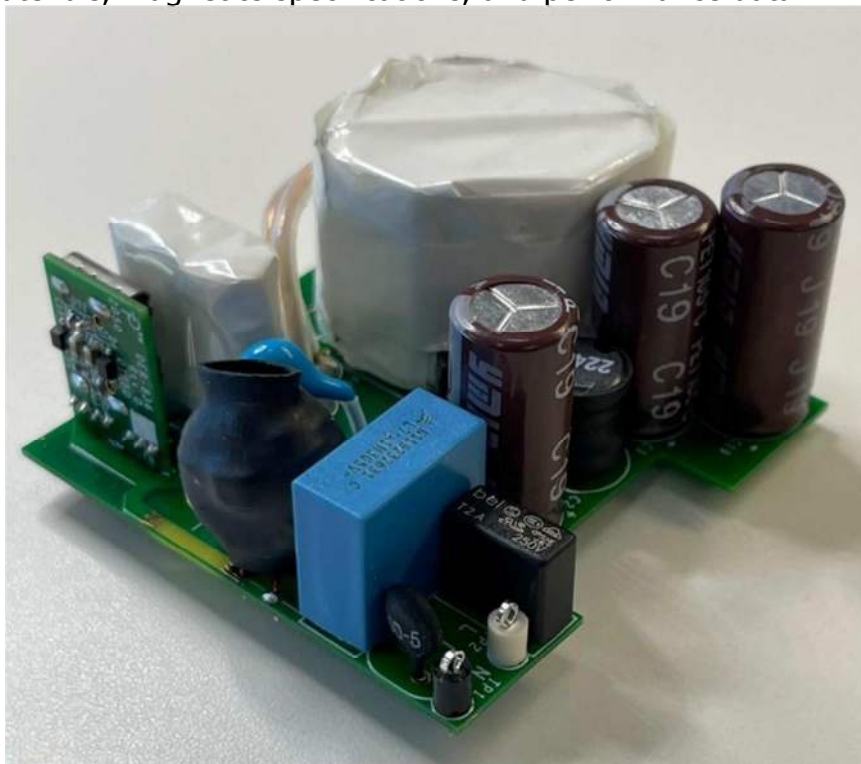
Populated Circuit Board Photograph, Entire Assembly.
